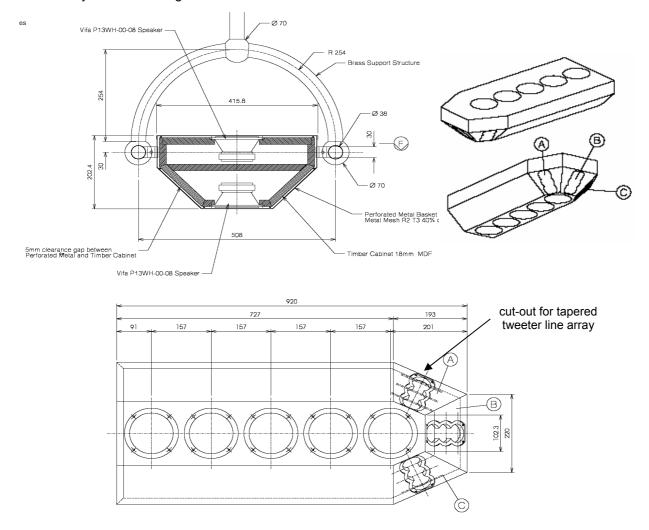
Section, plan and isometric views of Cardio-Bessel array.
